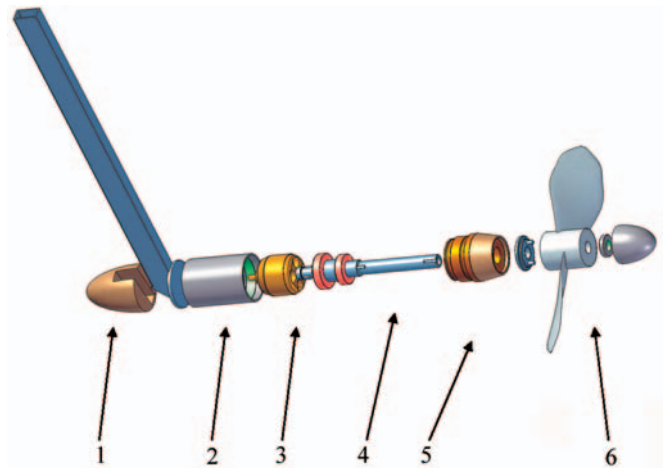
The simplified assembling drawing of the azimuthing propeller with the electric motor placed in the pod; 1 – fairwater, 2 – motor's seating, 3 – driving motor; 4 – stainless steel shaft with pair of bearings, 5 – second part of the propeller's pod with the seating of rolling bearings, 6 – propeller .
